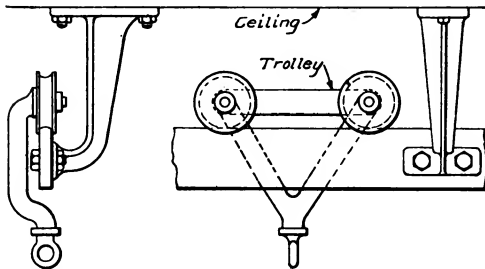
Method of Constructing Track Attached to Ceiling of Shop
